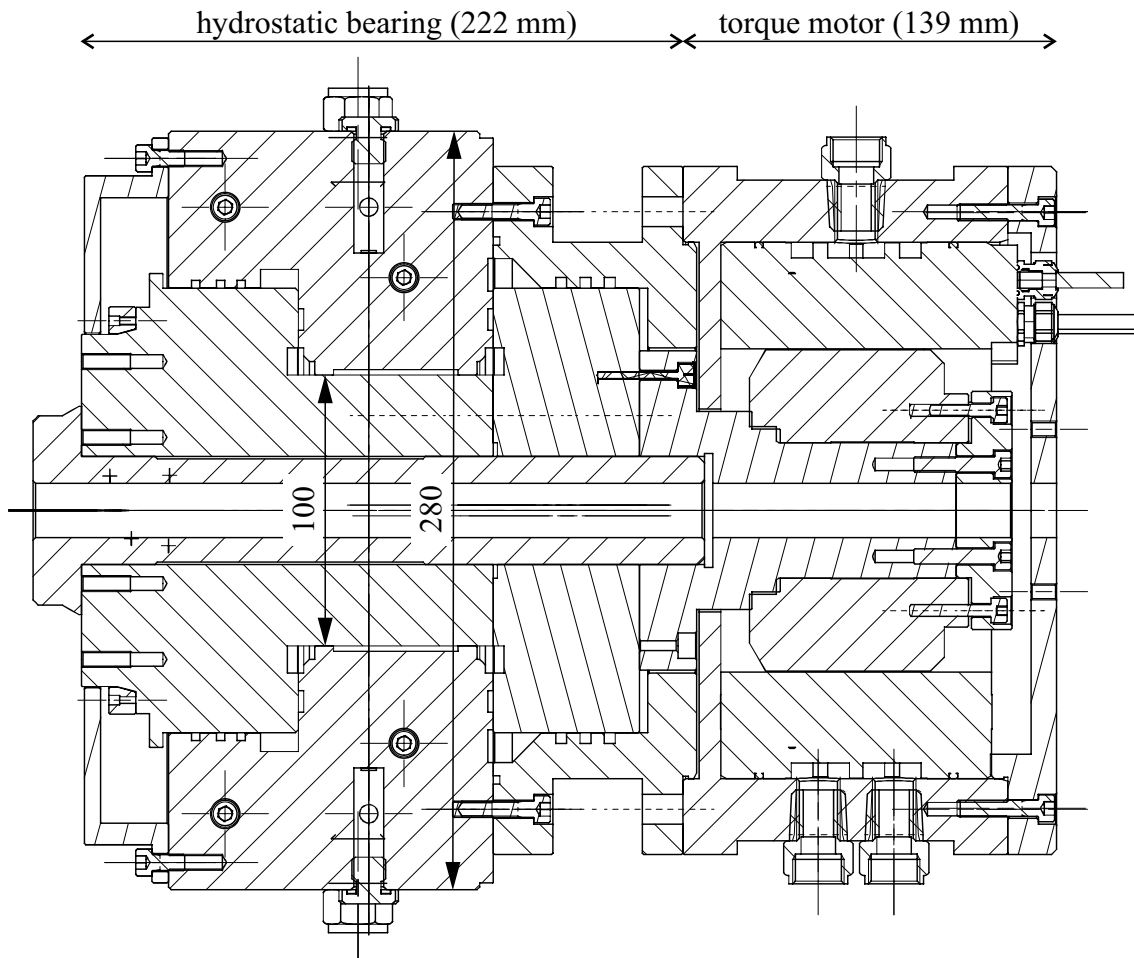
Section view of the printing roller's hydrostatic bearing with torque motor, designed by Roger Read from Cranfield University
